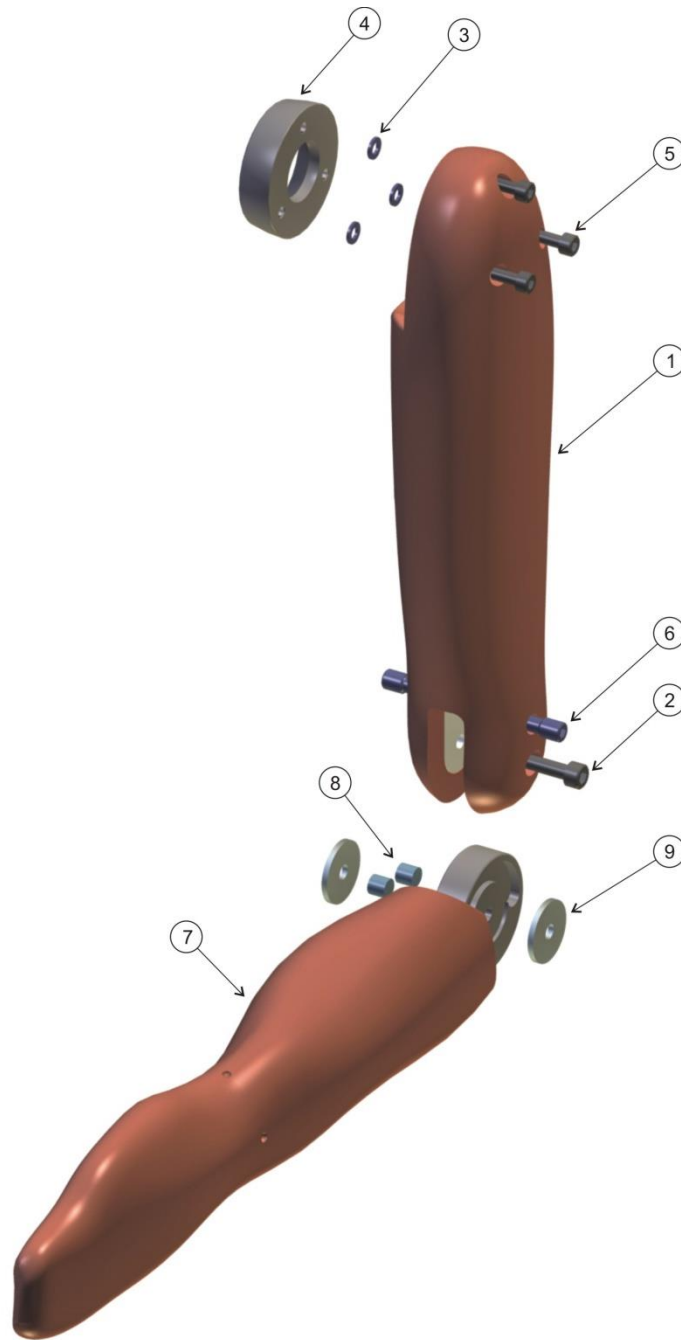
Left Arm Assembly (Right Arm similar but opposite)
